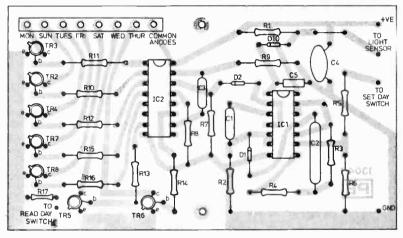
Printed circuit and component layout of prototype. Note that on the prototype, resistors R18 to R23 have been eliminated by placing R17 in series with the Read Day switch.
